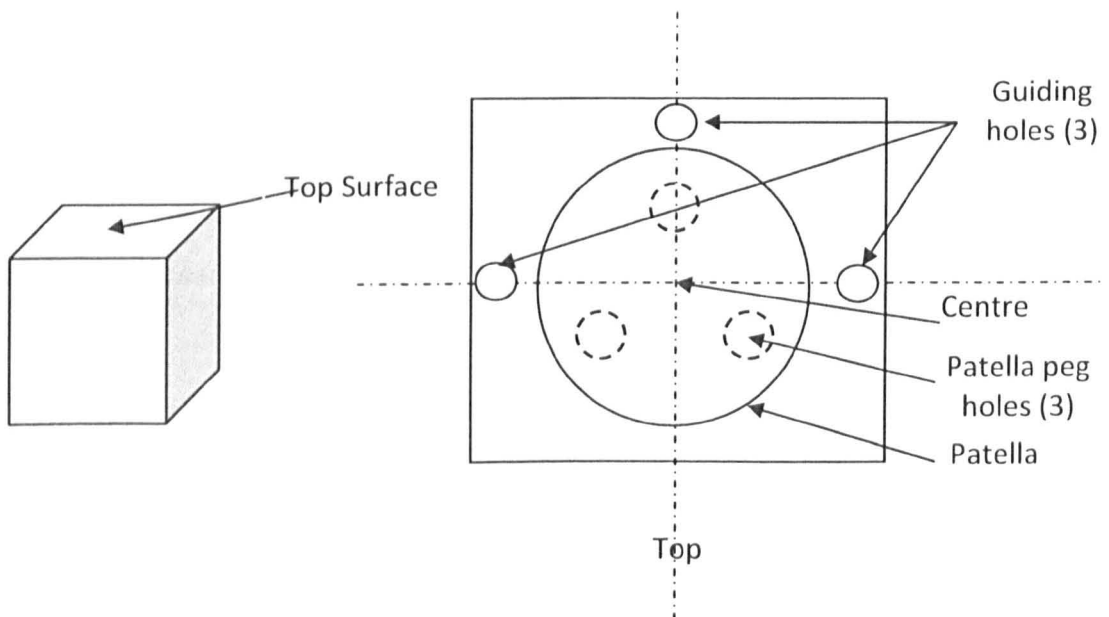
Holder for patella when used in CMM or Talysurf measurements.
